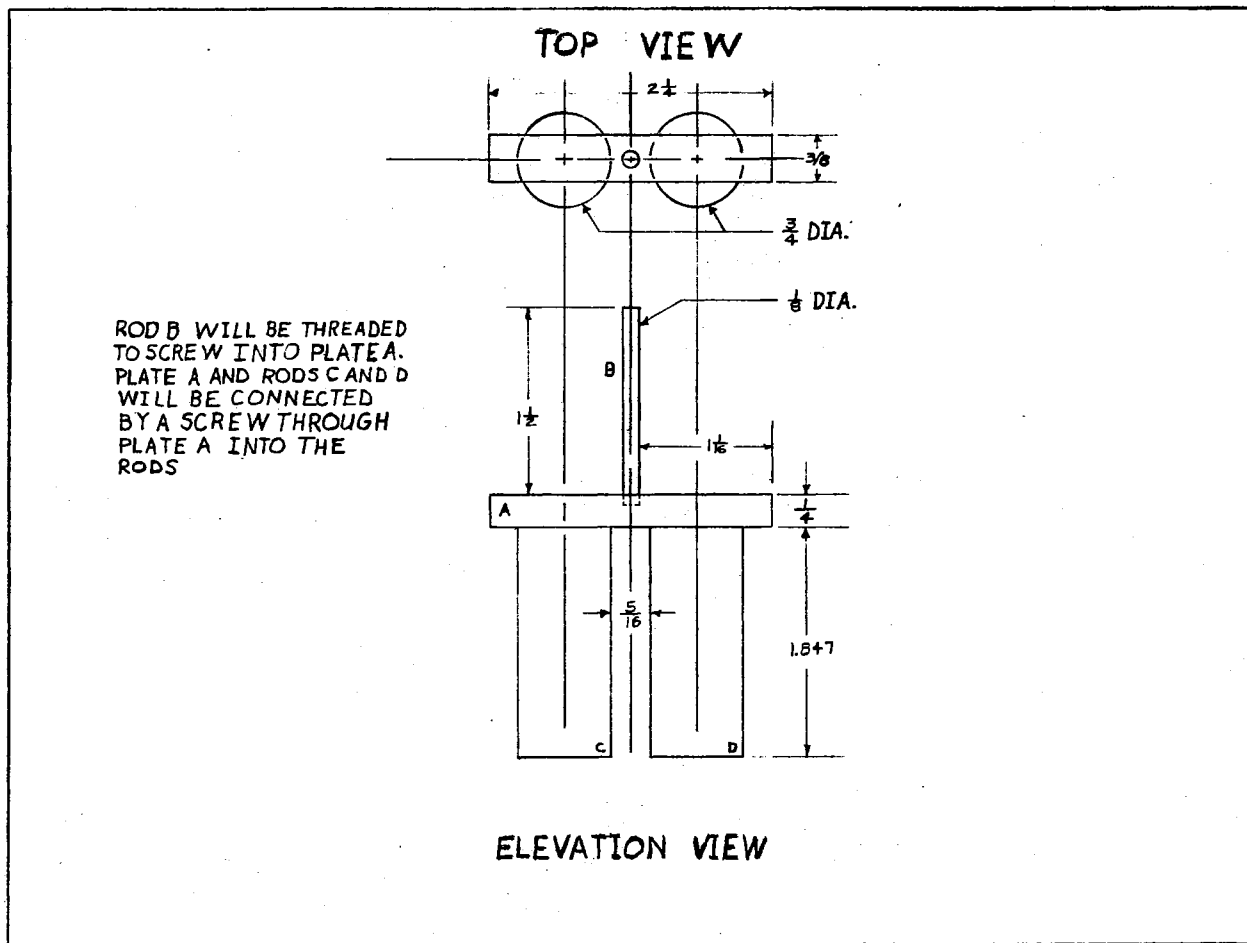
Detailed Dimensioned Drawing of the Calibration Bar for the 100 ml Evaporative Dosimeter
